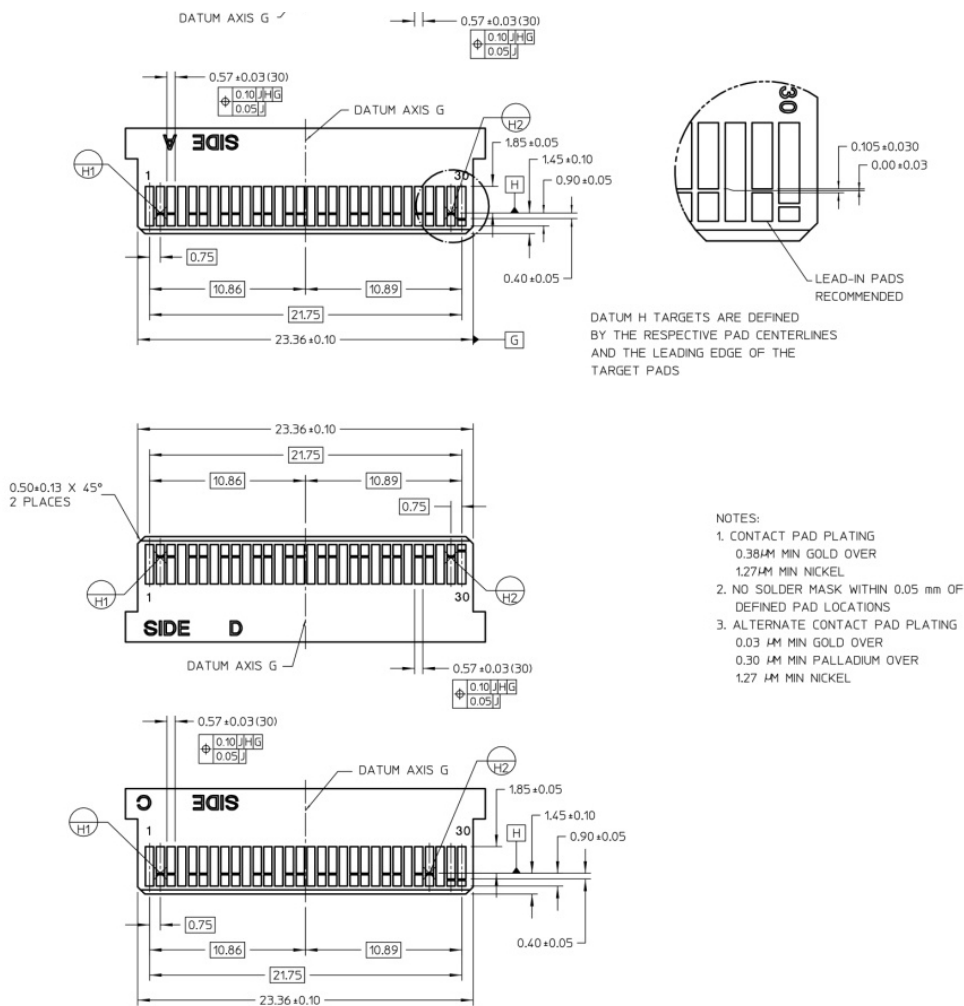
Pattern Layout for CDFP Style 1/Style 2/Style 3 Printed Circuit Board
